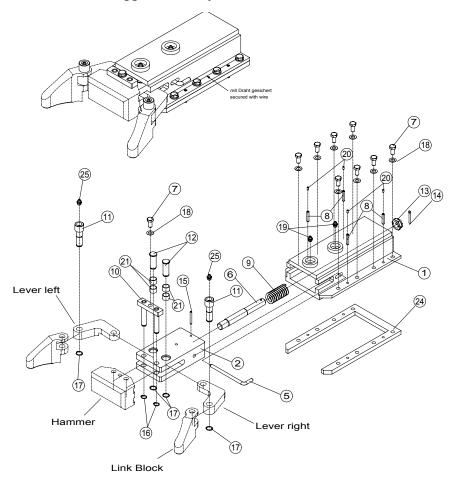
613844 Trigger Assembly ACL / VES ACL
